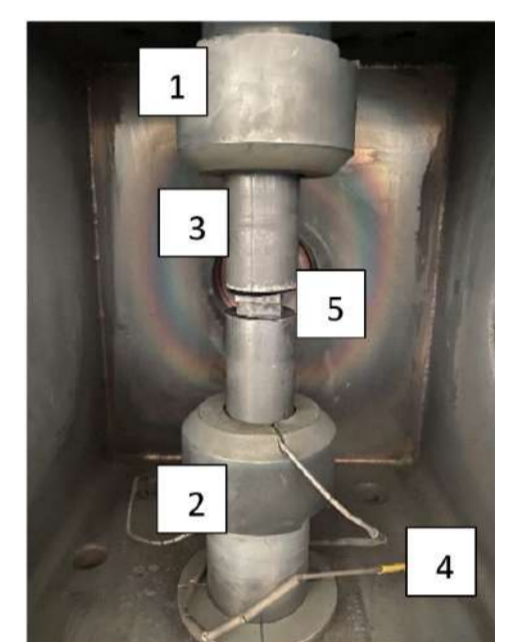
Scheme of placement of blanks before electric resistance welding: 1 - hydraulic cylinder, 2 - graphite insert, 3 - punches, 4 - thermocouple, 5 - welded blanks.
